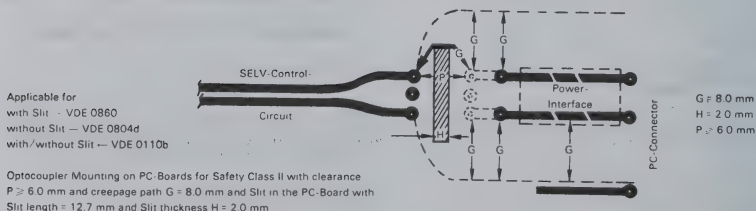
OPTOCOUPLER MOUNTING ON PC BOARD
